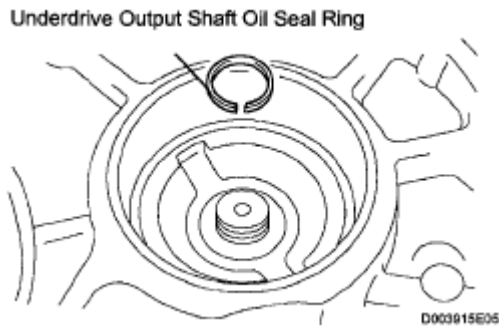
Identifying Underdrive Output Shaft Oil Seal Ring
